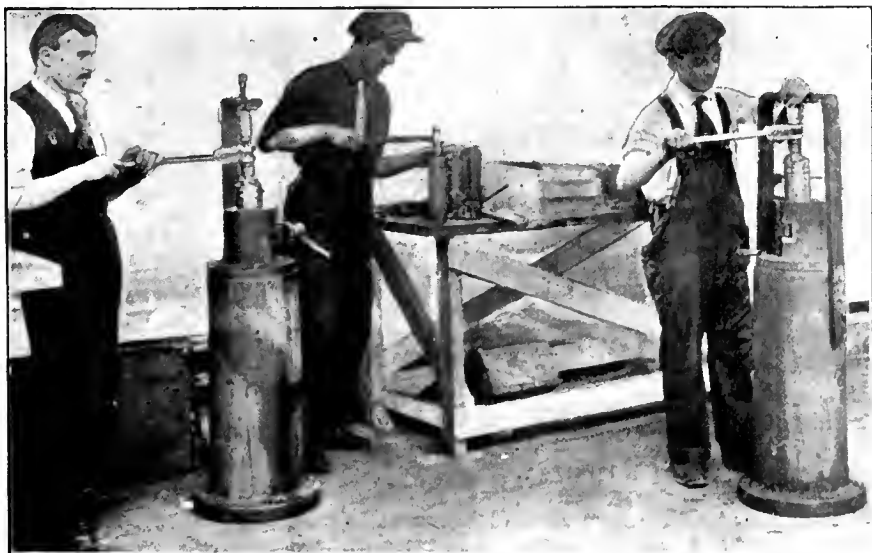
SCREWING AND RIVETING REINFORCING DISCS INTO BASES OF HIGH EXPLOSIVE SHELLS.
